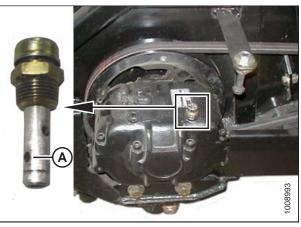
Side View of Knife Drive Box and Close-up of Dipstick
